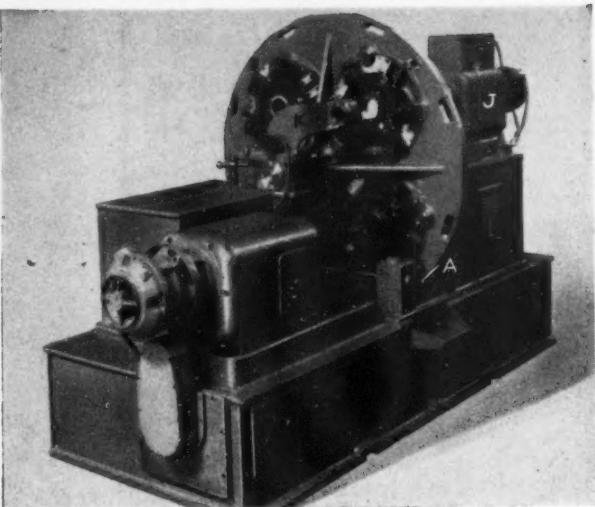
Unit-head Machine for Boring and Facing Mining Truck Wheels
